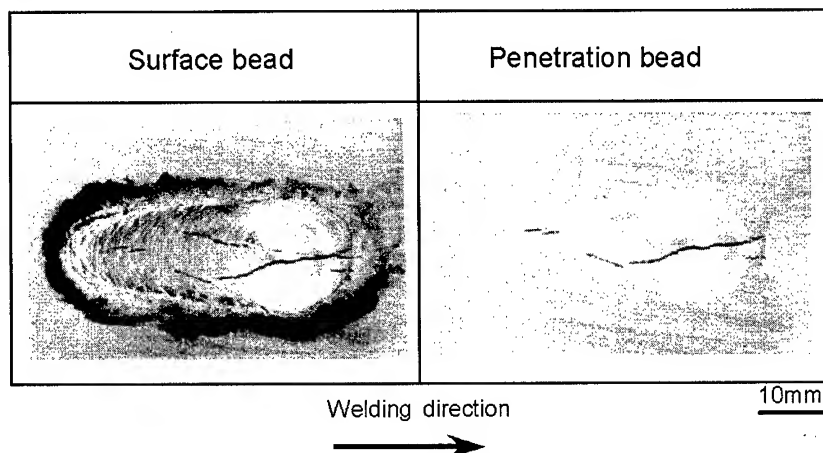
Bead appearance of AC TIG welded AZ31 magnesium alloy after cracking test.
